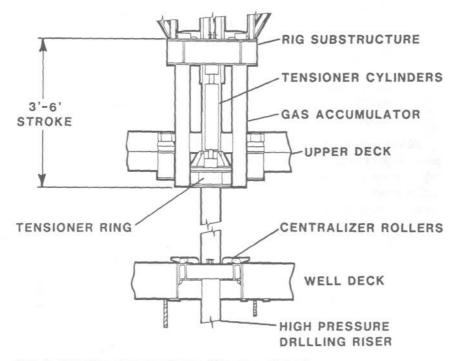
Drilling riser tensioner. (Courtesy Vetco)
